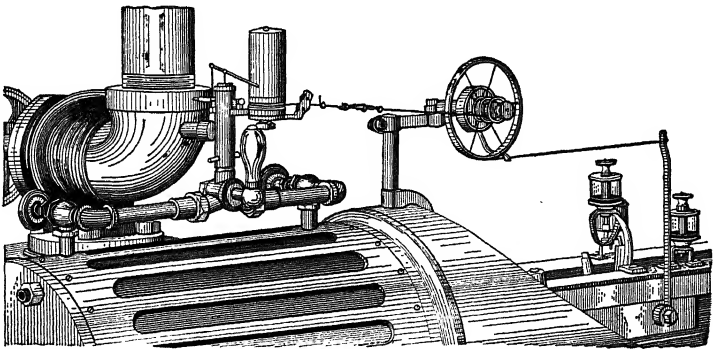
REDUCING WHEEL OF FIG. 441 APPLIED.
